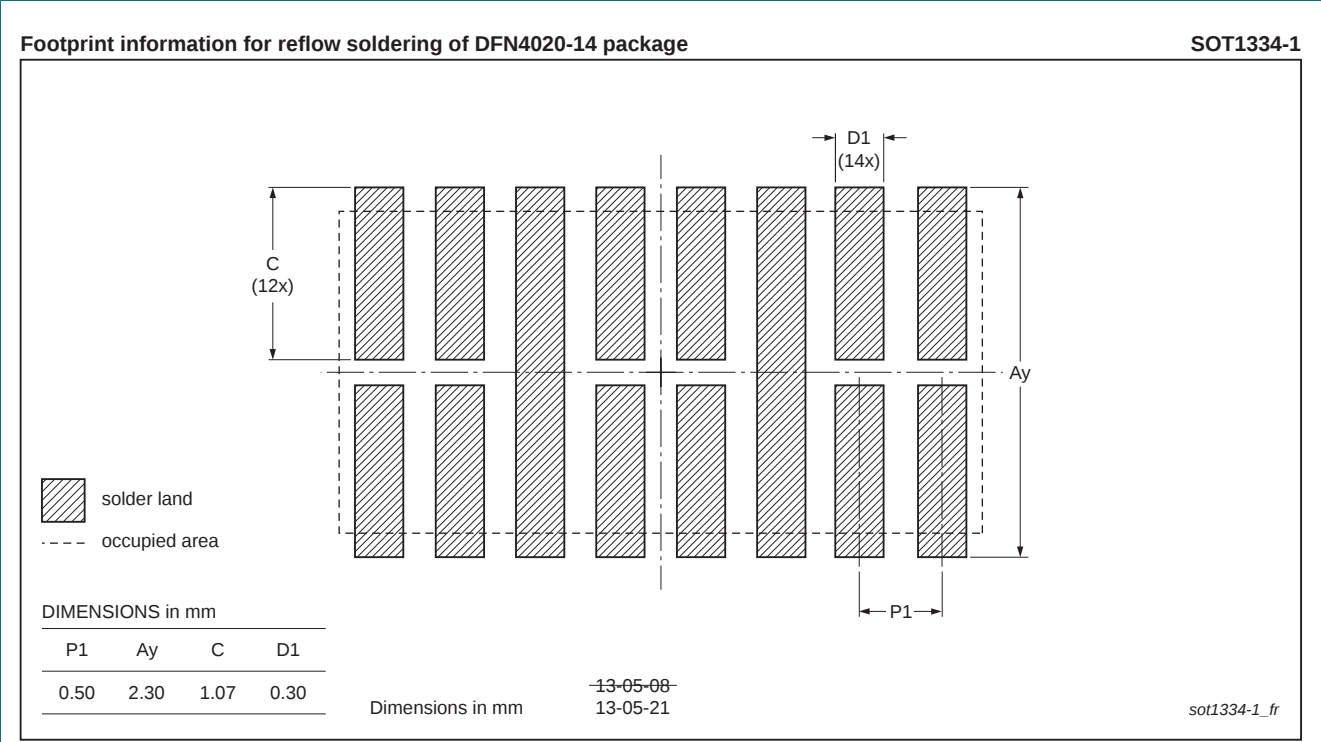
Reflow soldering footprint DFN4020-14 (SOT1334-1)
